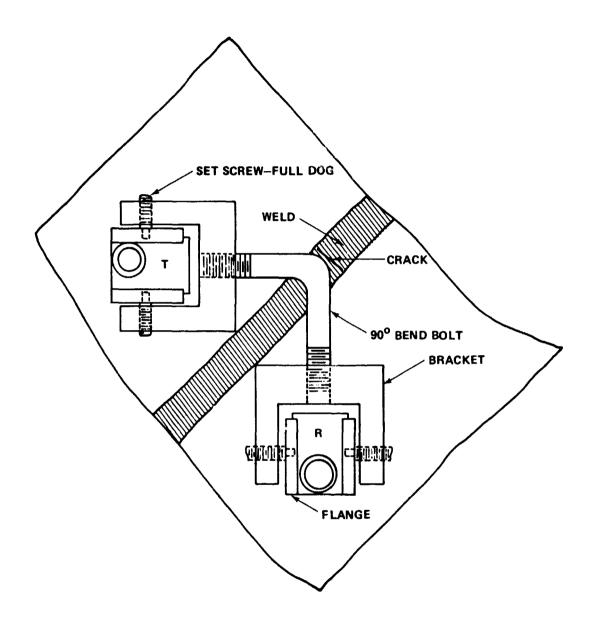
Transducer alignment fixture for use in detecting transverse cracks.
